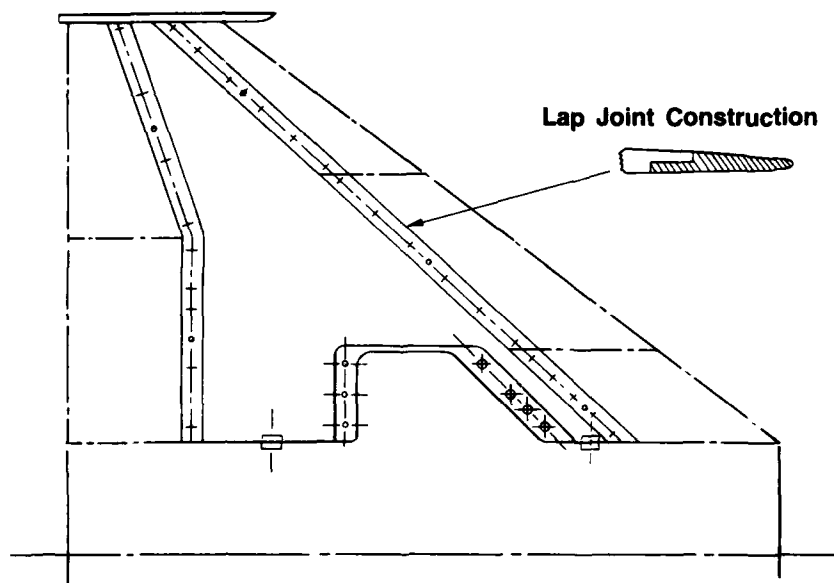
EXAMPLE OF A WIND TUNNEL MODEL MODULAR WING
